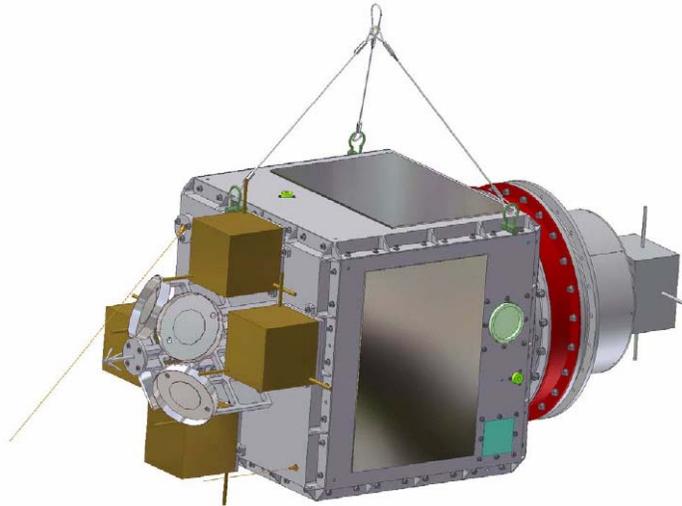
Lifting Cable Attachment Pattern – Horizontal Configuration (Vertical was Used for QM Test Campaign)
